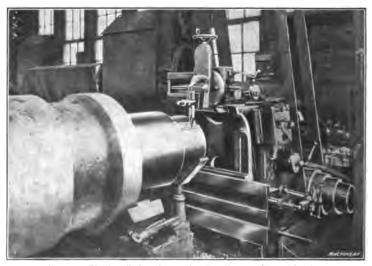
Planing End of 20-ton Steel Roll, with Shaper having Side-traversing Tool-head
